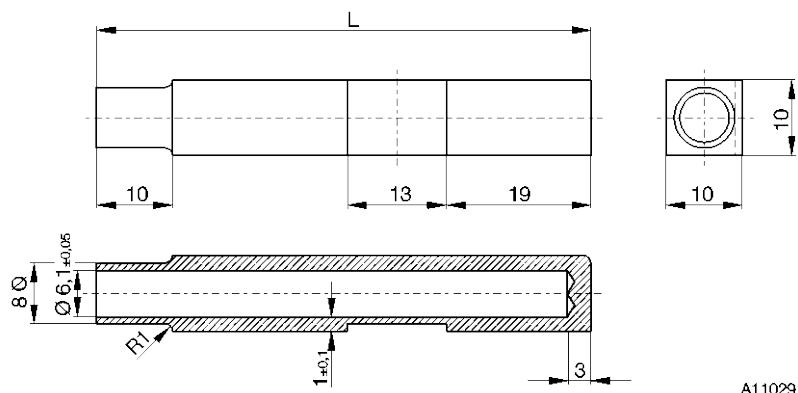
Molded part for tension clips up to 500 mm, other versions available on request
